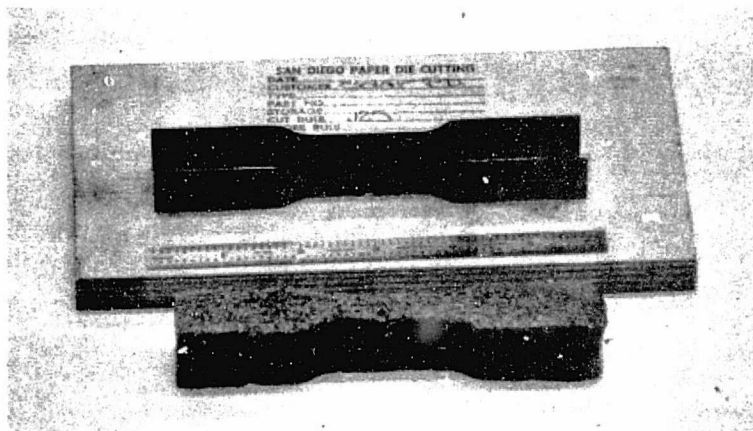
DIE FOR STAMPING OUT SPECIMENS FOR TENSION AND ELONGATION TESTS
